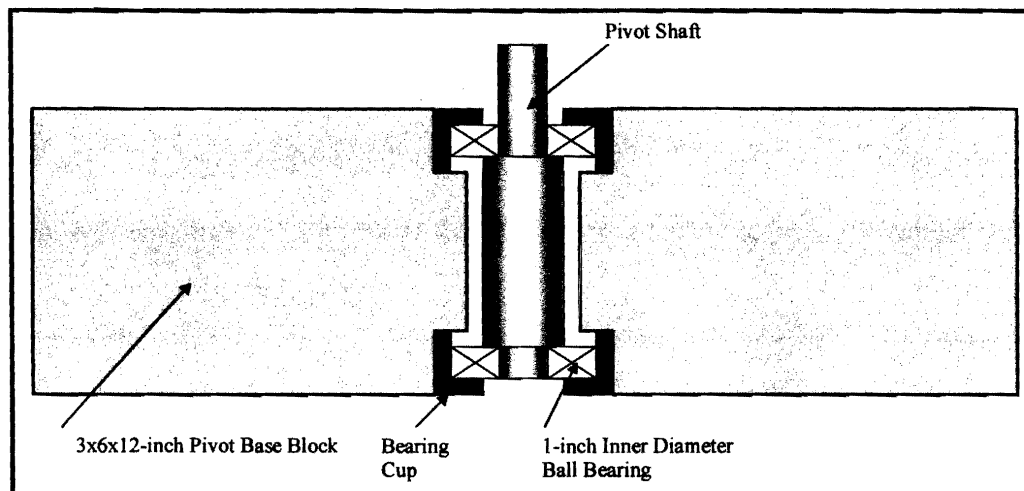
3 Pivot Shaft Assembly Diagram
